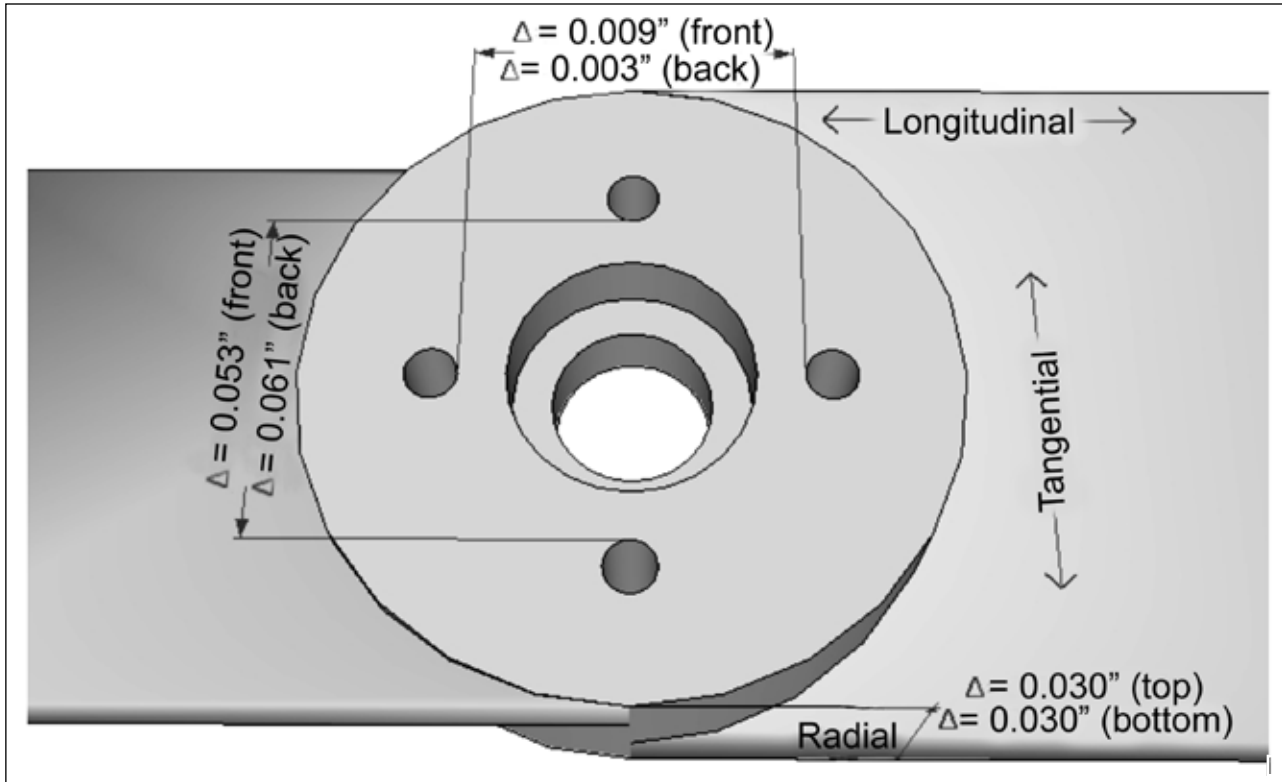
Dimensional change Δ of the spacing of the bolt holes.
